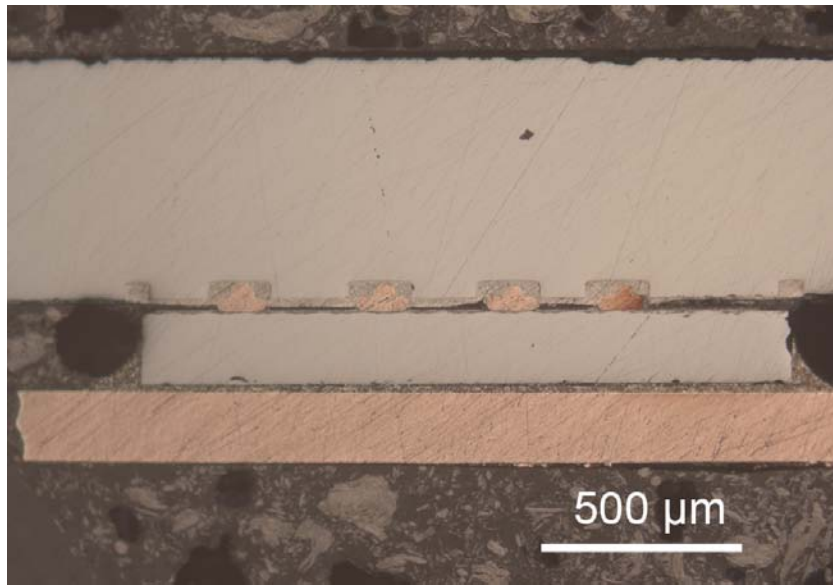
Cross section of ball bond sample soldered to Template 3.
